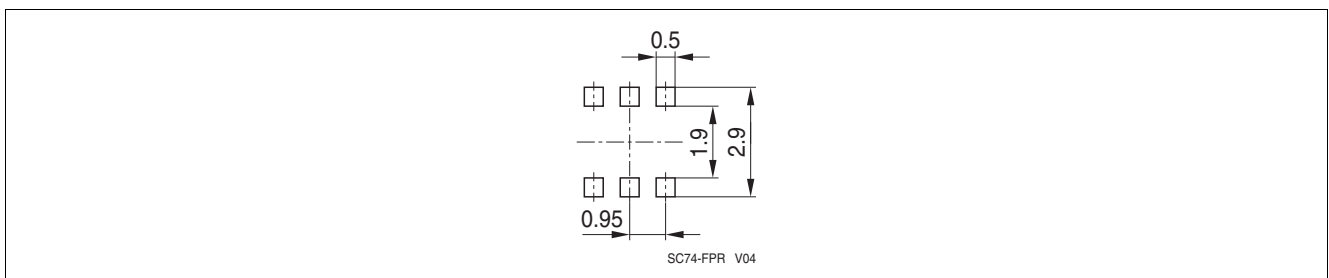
Package Footprint for SC74 (dimensions in mm)
